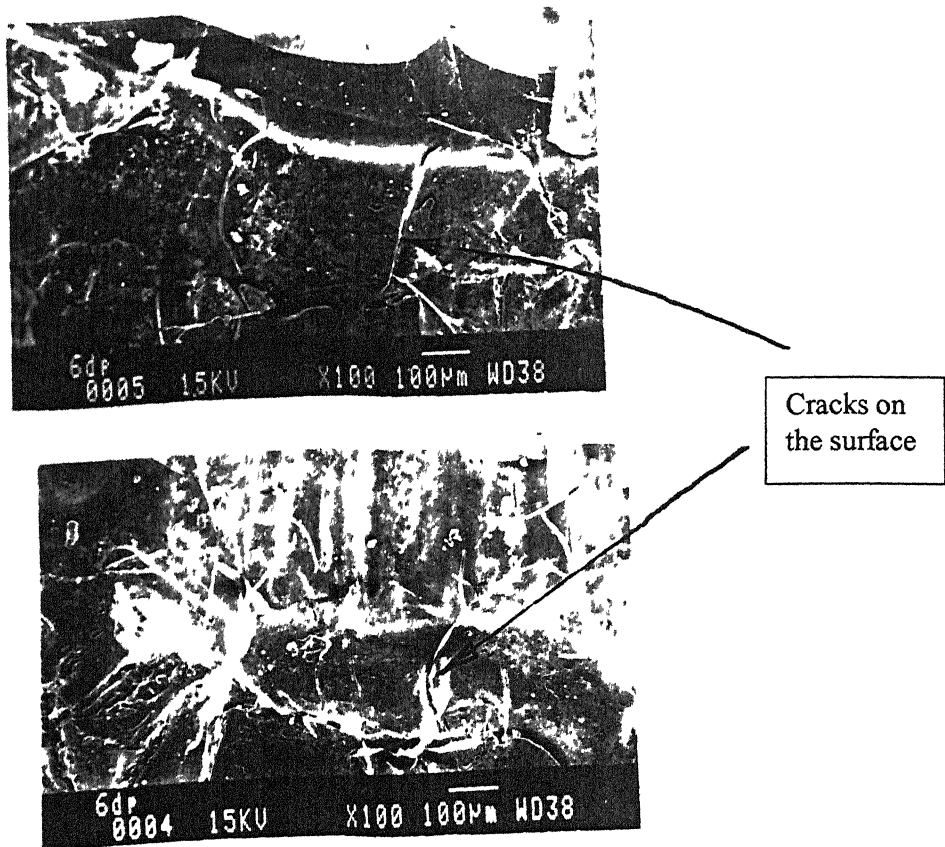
7 Cracks on the machined surface for ECSMWDP process
